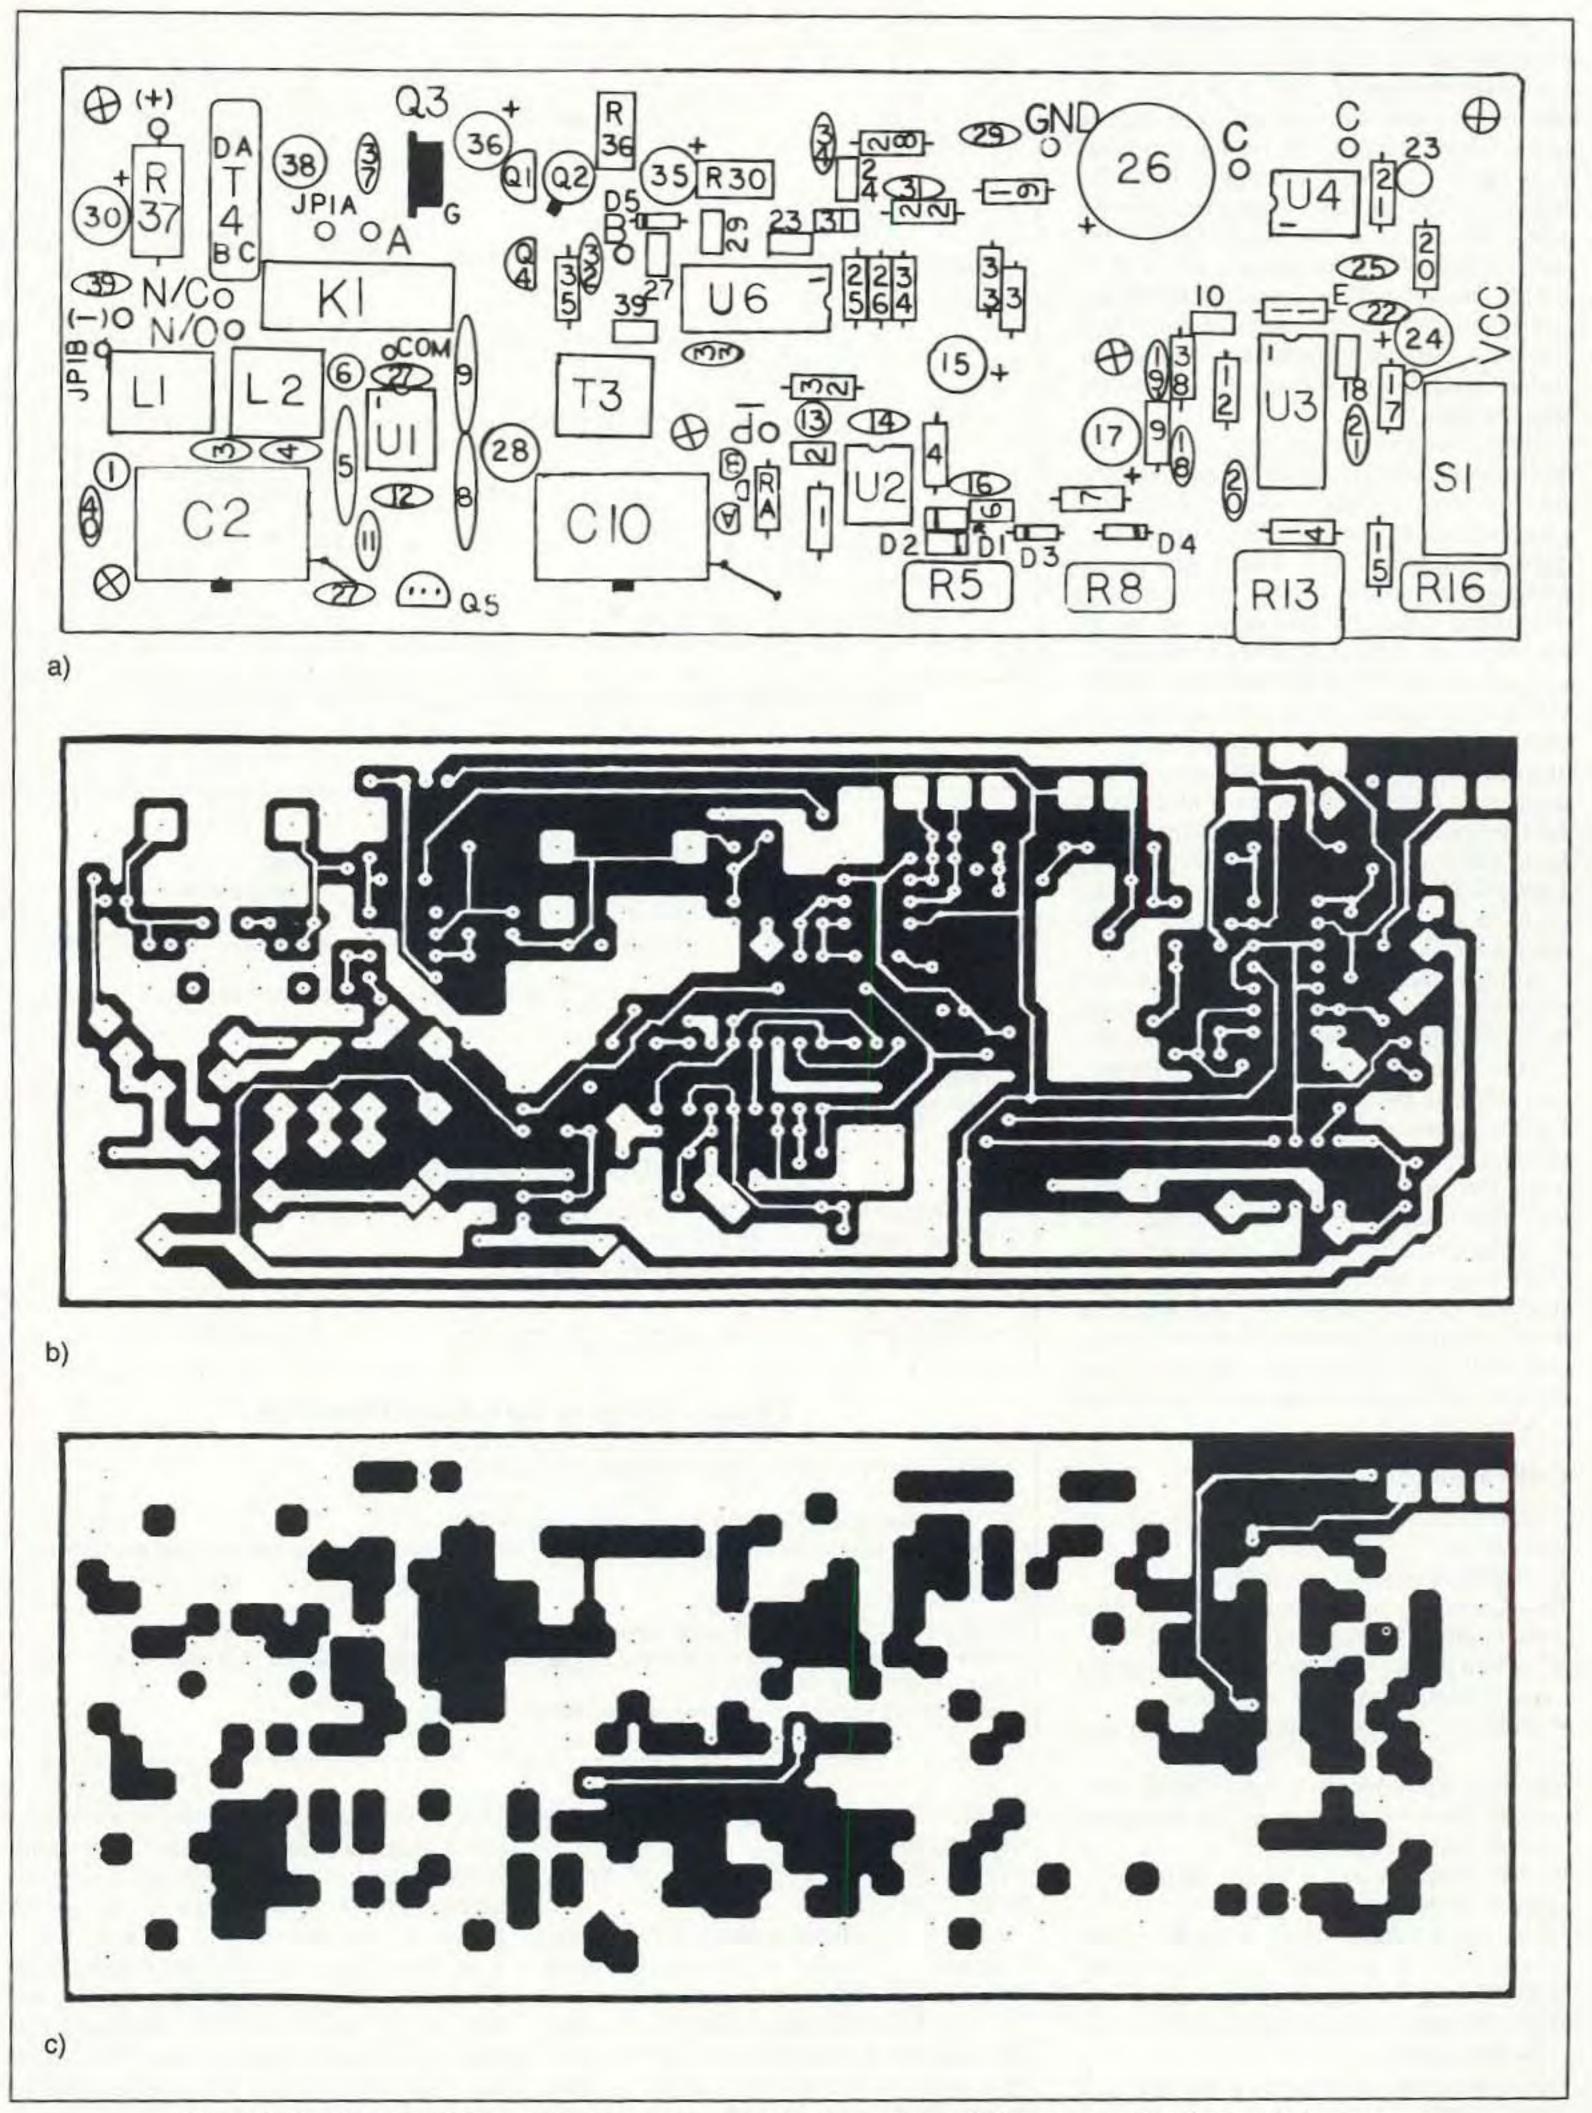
Double-sided PC board: (a)parts placement diagram, (b) top foil pattern, and (c) bottom foil pattern.
